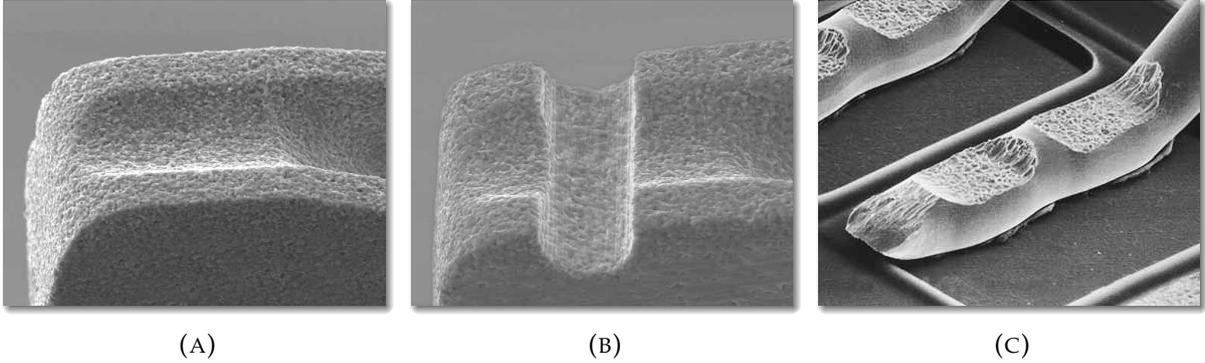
Reducing deformation width of wirebonds by incorporating a linear groove in wedge tools (Source: Micro Point Pro [9]). (A) Linear grooved wedge tool for Al bonding; (B) Linear and cross grooved wedge tool for Au bonding; (C) Au wirebond with linear and cross groove wedge tool.
